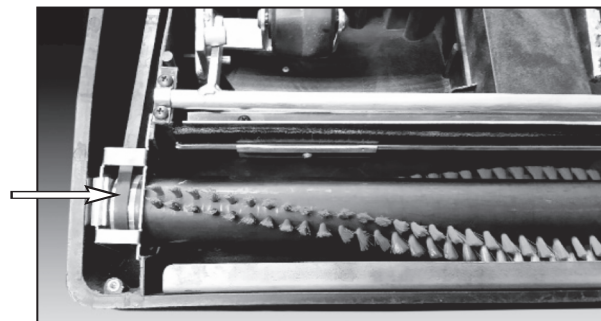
With a 10mm wrench, secure the nut inside of the brush roll and use a 4mm Allen wrench for the screw. Loosen screws to release the brush from the vacuum.
